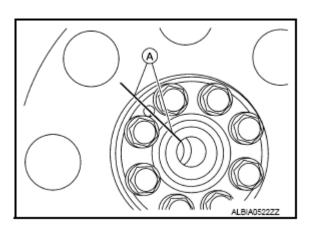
Aligning Match Mark On Crankshaft And Drive Plate Courtesy of NISSAN NORTH AMERICA, INC.
